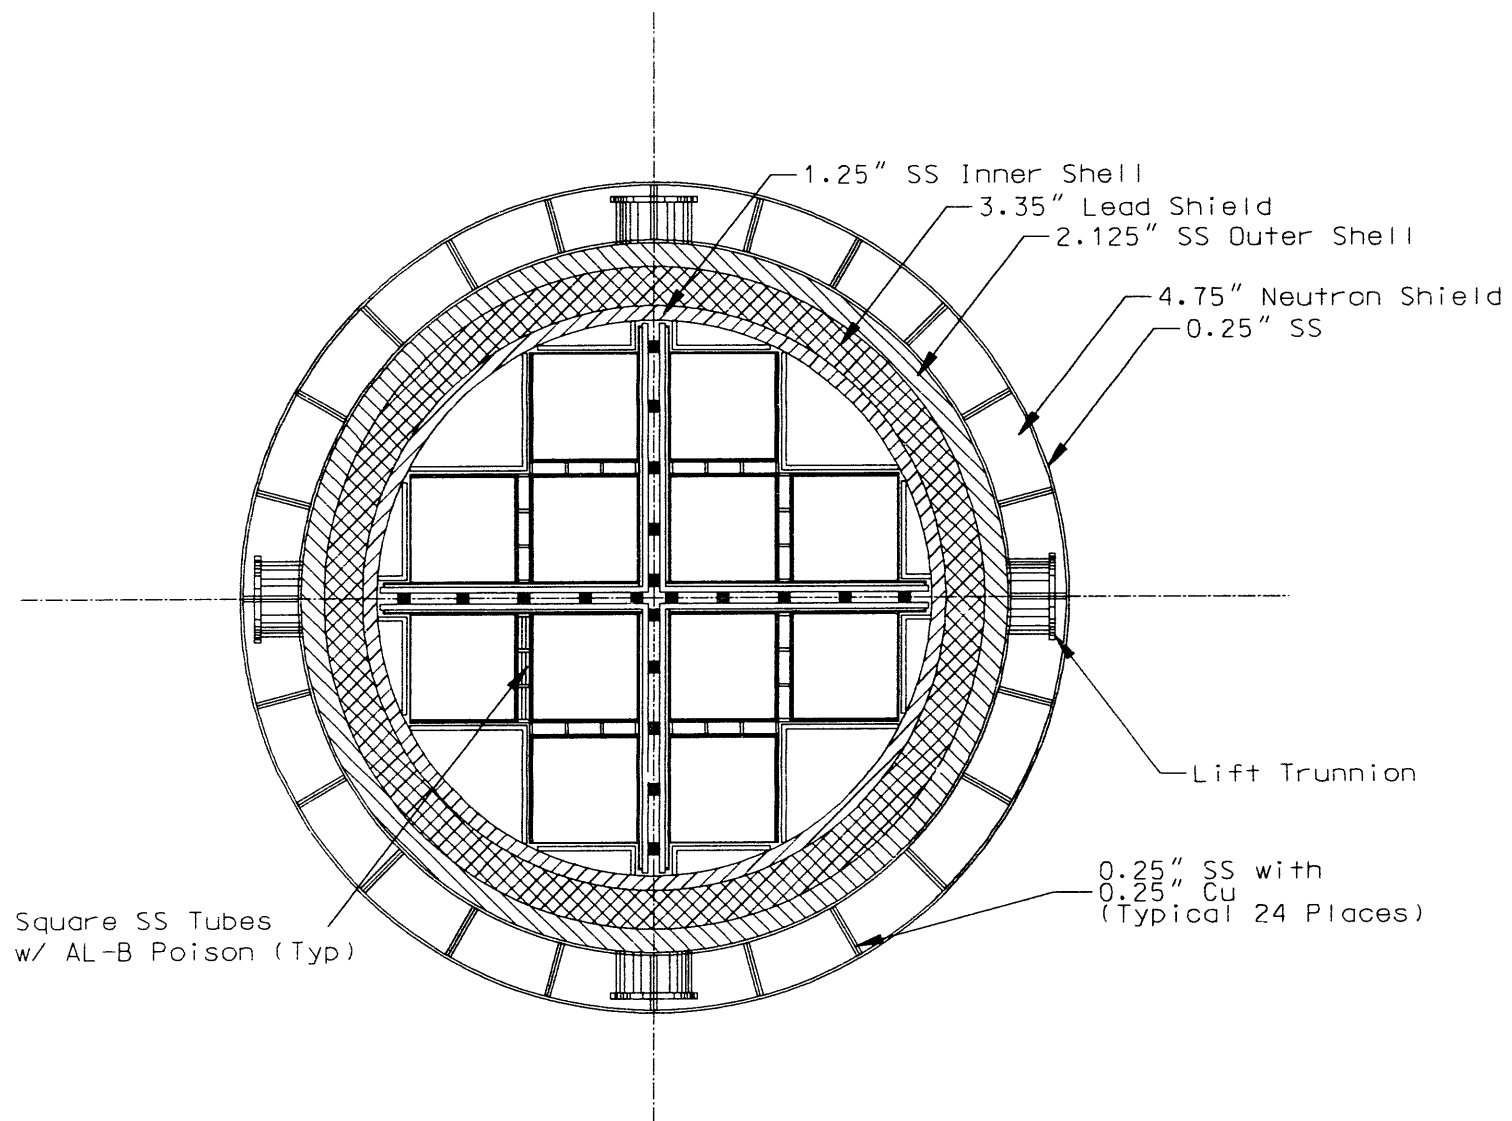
75-Ton TSC Metal Cask For 12 PWR Fuel Assemblies (End Section View)
